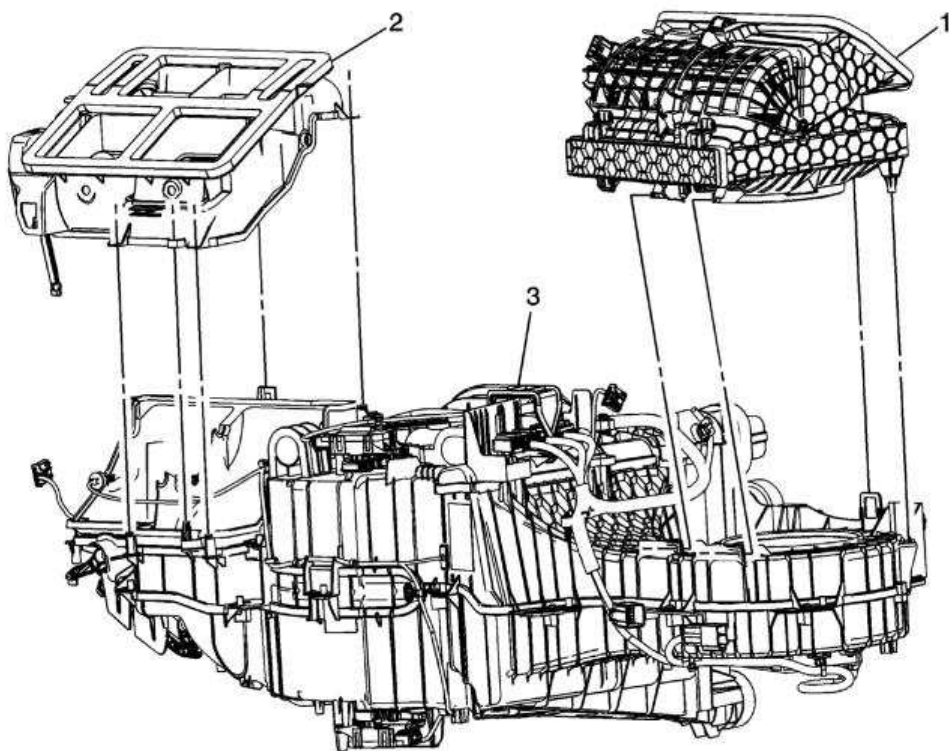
Heater and Air Conditioning Evaporator Case (C42)
